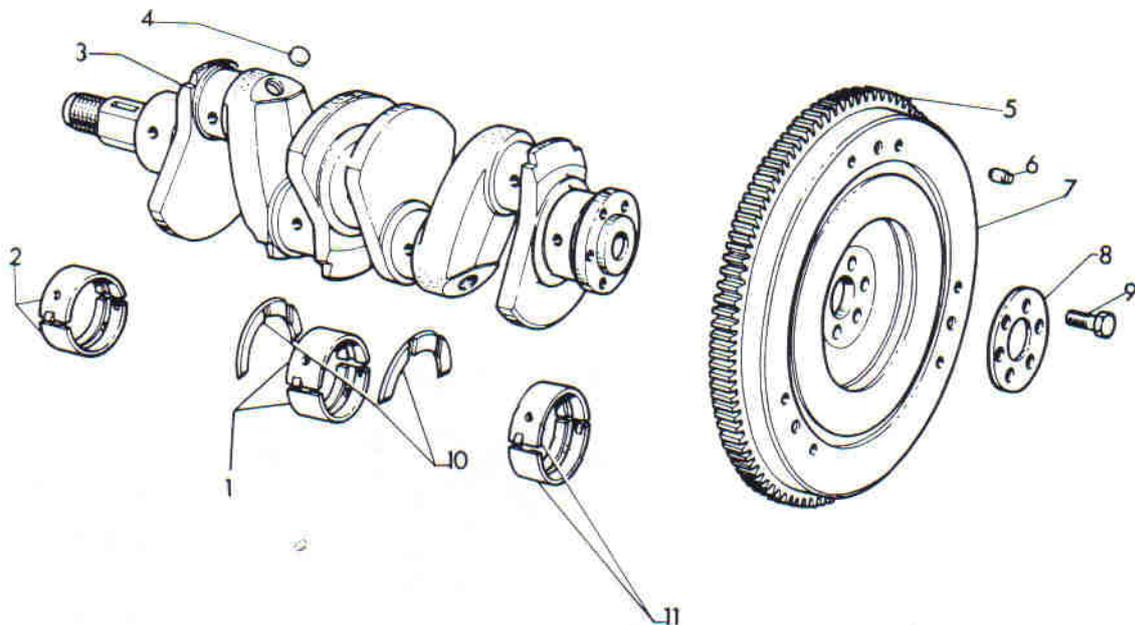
Crankshaft and flywheel (Sec 16)
